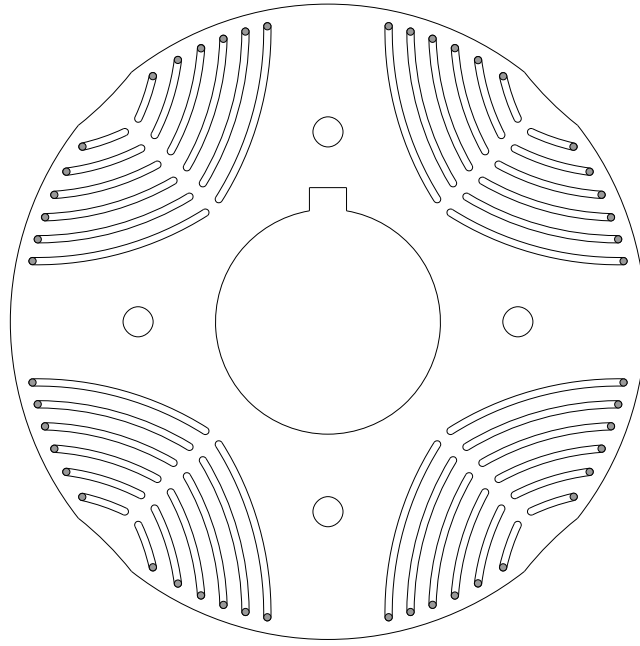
TL RSM rotor with rotor cage included in rotor barriers
